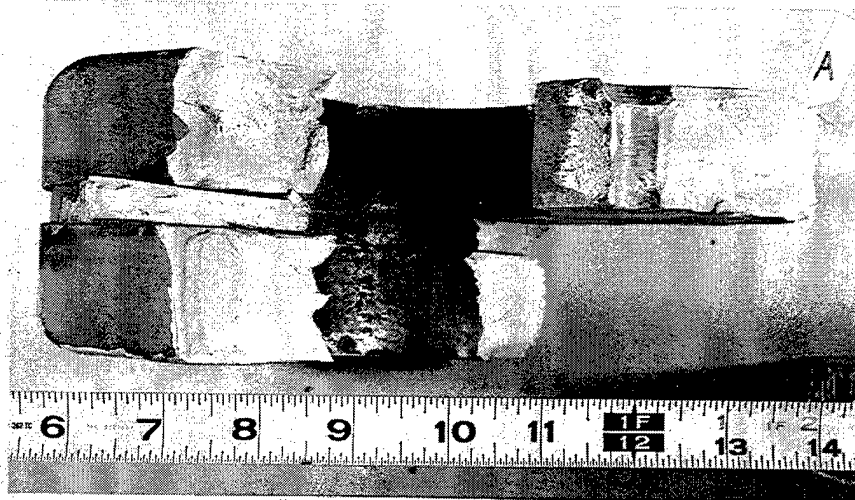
Top view of the broken section in Figure 7, showing the fractured surfaces. Two forged aluminum connector parts were riveted to a 3/8-in-thick inboard girder web aluminum plate (between the forged parts). The top broken piece is a section of the forged inboard connector part, whereas the bottom piece is a section of the outboard connector part. The location at A is the origin of the brittle failure.
